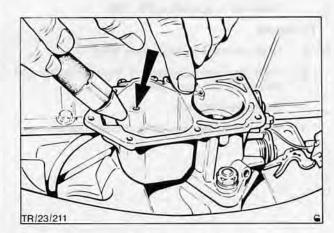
Accelerator ball valve and weight held in position when cleaning
